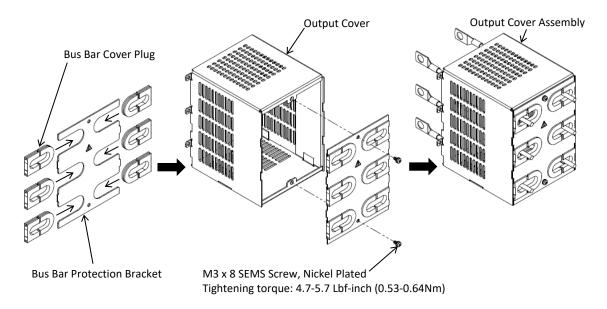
Three 60V-100V Units, Wire Diameter ≤ 11mm, Output Cover Assembly
